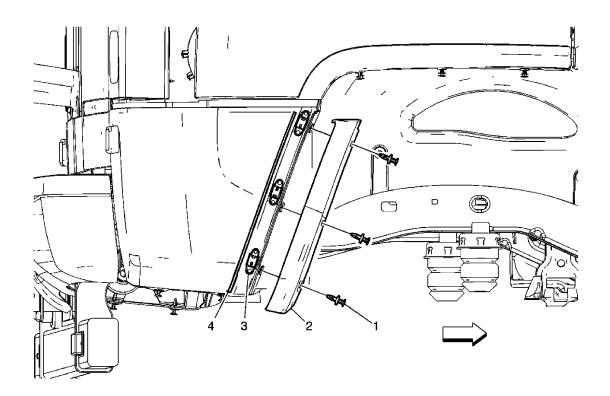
Identifying Rear Wheel Opening Flare (Rear Bumper w/BRM & RHD) Courtesy of GENERAL MOTORS CORP.
